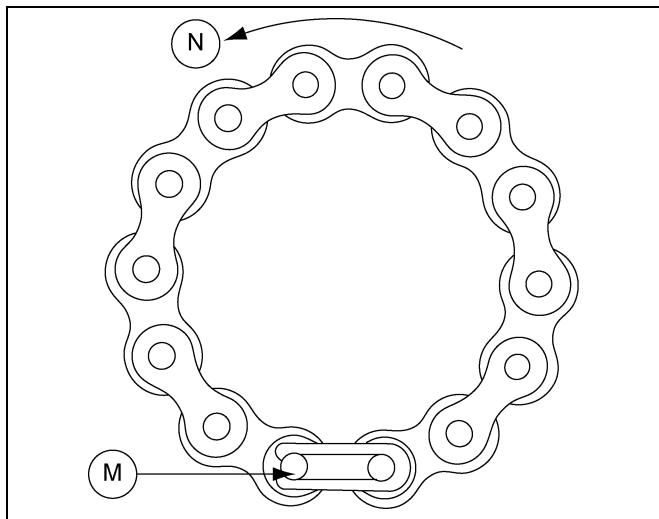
L Viewed with the clip on the gearbox side away from the flighting.
